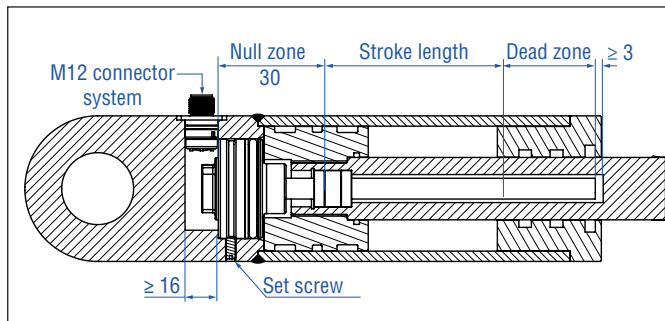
Example of In-Cylinder assembly with M12 connector system
